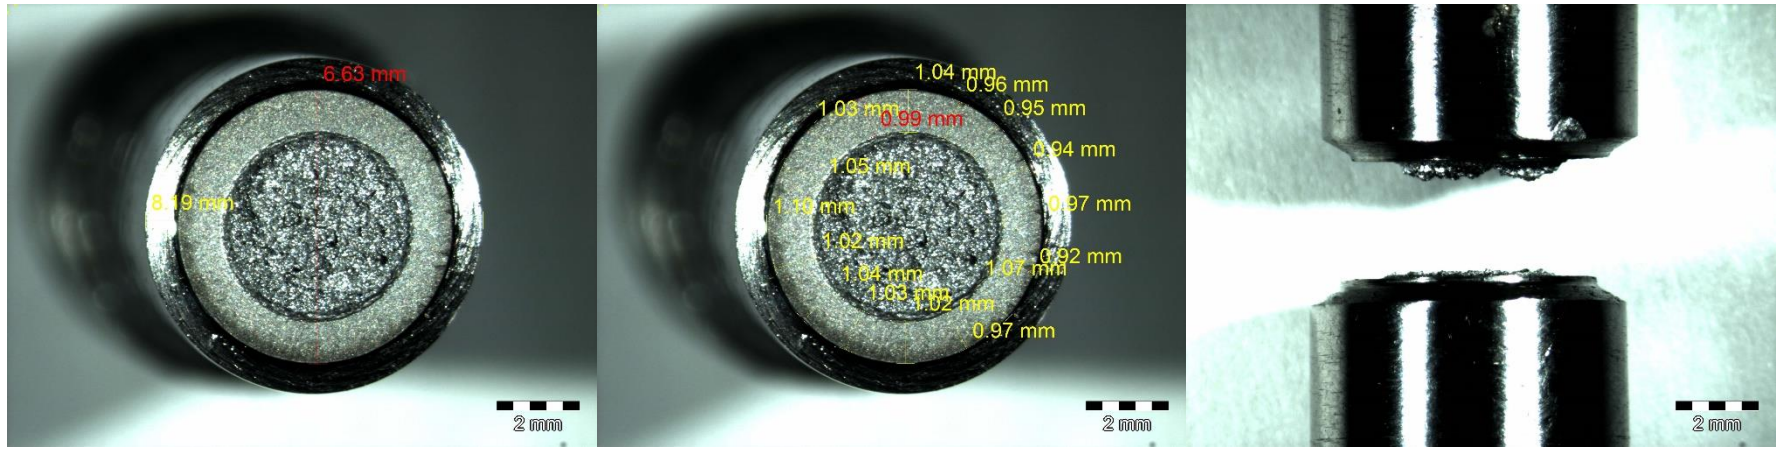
Cross-sectional and side view of fractured S355LSD-03
